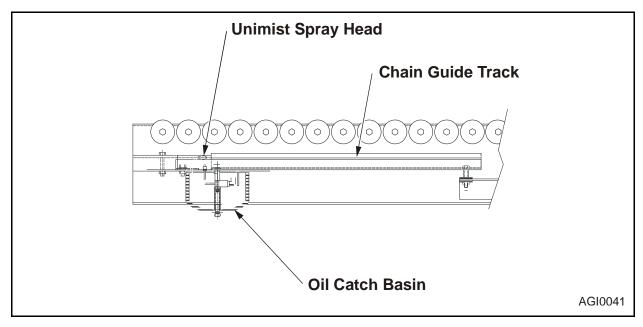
27 Chain Track Lubricator - Solenoid-Controlled
